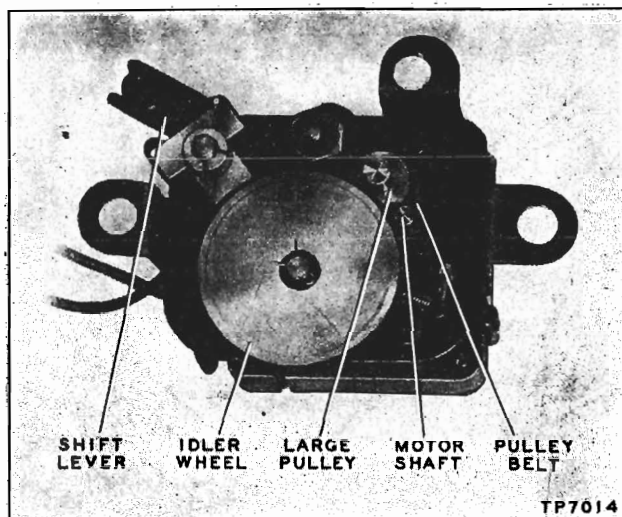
Motor, Showing Pulley, Bolt, and Shift Lever
